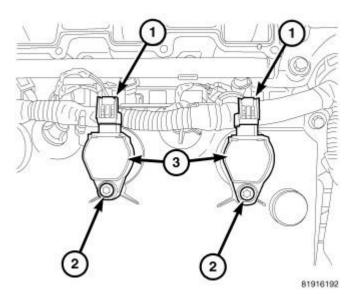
Ignition Coils, Mounting Bolt & Electrical Connectors Courtesy of CHRYSLER LLC
